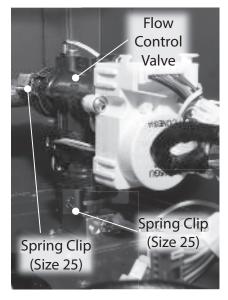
Spring Clips (Size 25), Flow Control Valve (B3)
